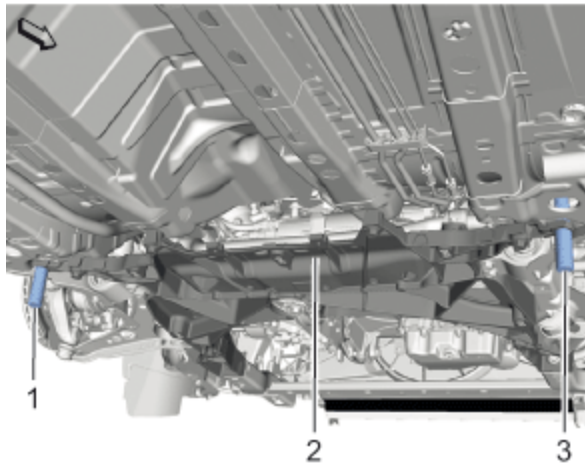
Drivetrain And Front Suspension Cradle And Alignment Pins
